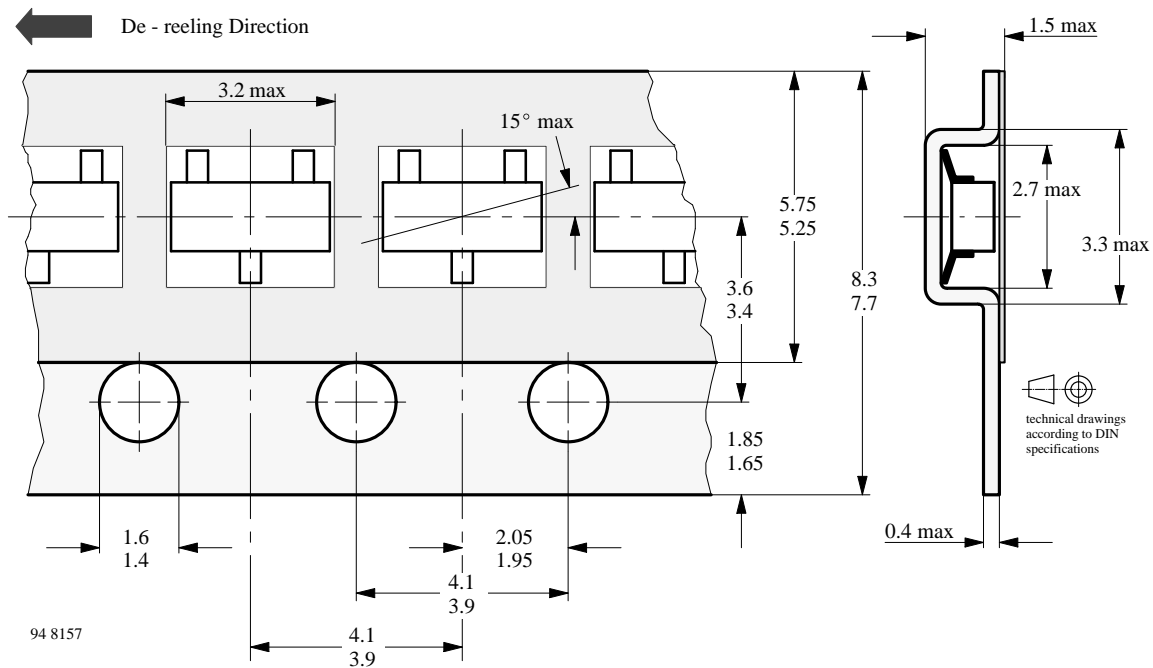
Tape dimensions in mm for SOT 23. The mounting side of the components is oriented to the bottom side in the tape.
